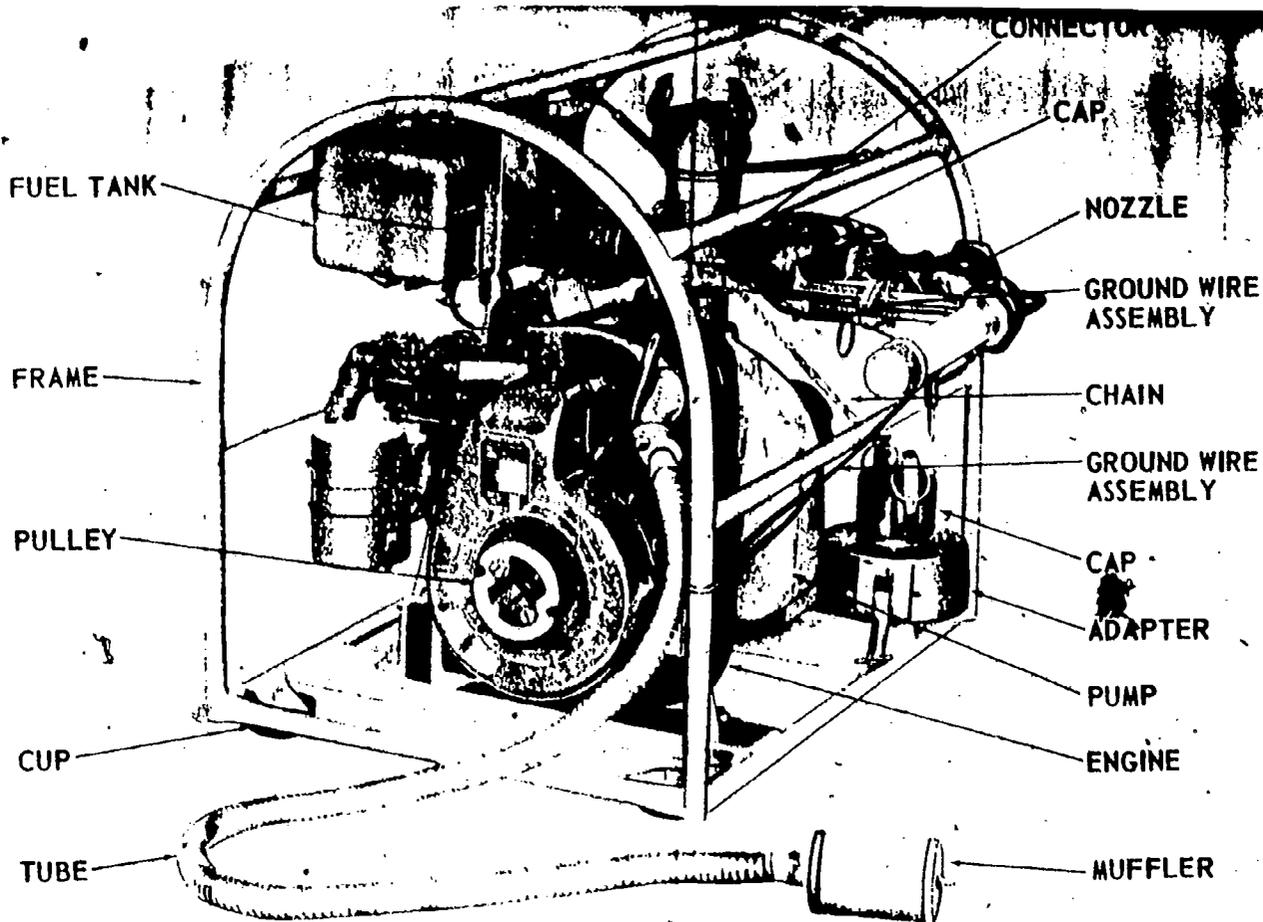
Pump assembly, model, 803 removed from skid base.
